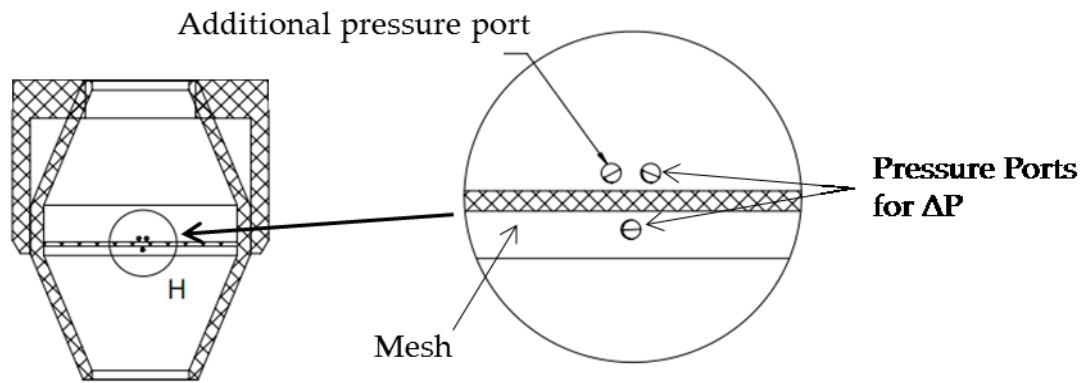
Custom made pneumotach module 3D model, top plane section view and detail view (circle).
